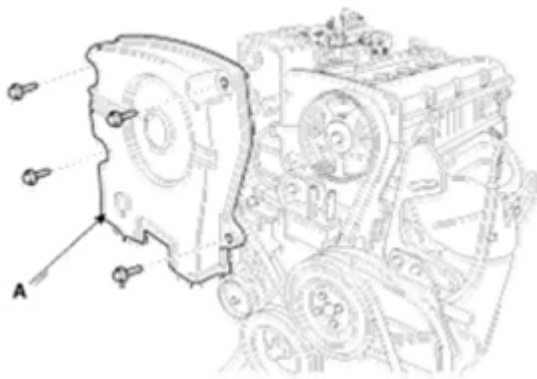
Identifying Timing Belt Upper Cover & Bolts
